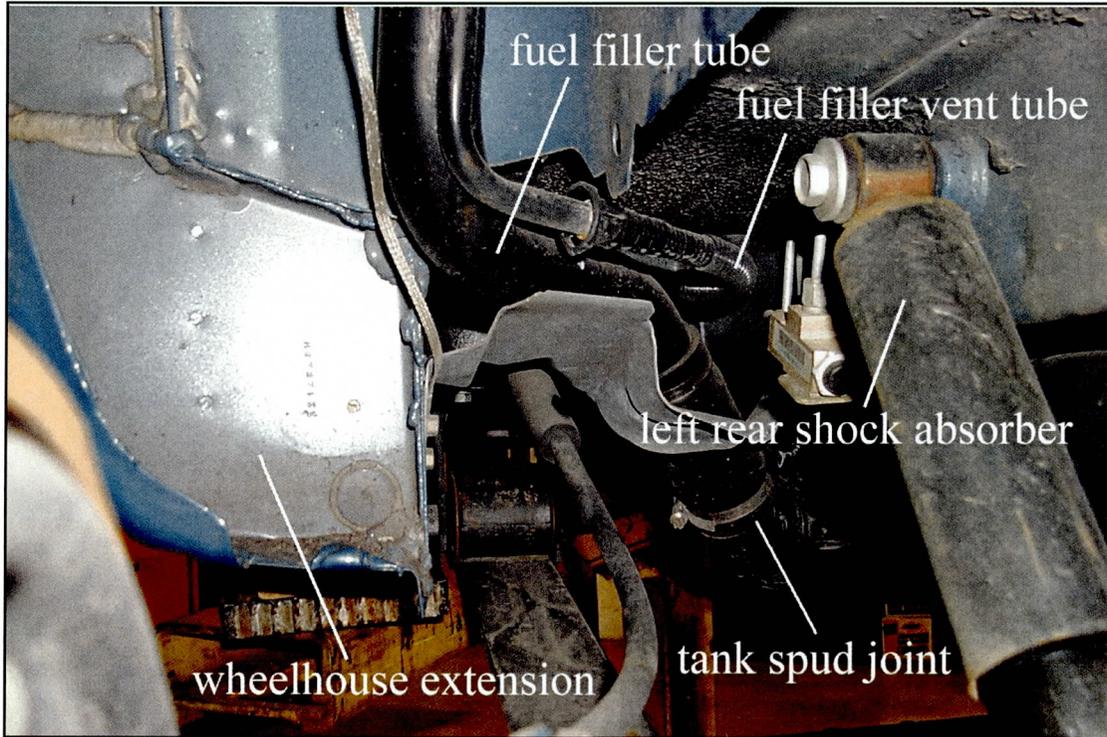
Filler Neck Assembly Packaging/Routing (Exemplar Vehicle).
